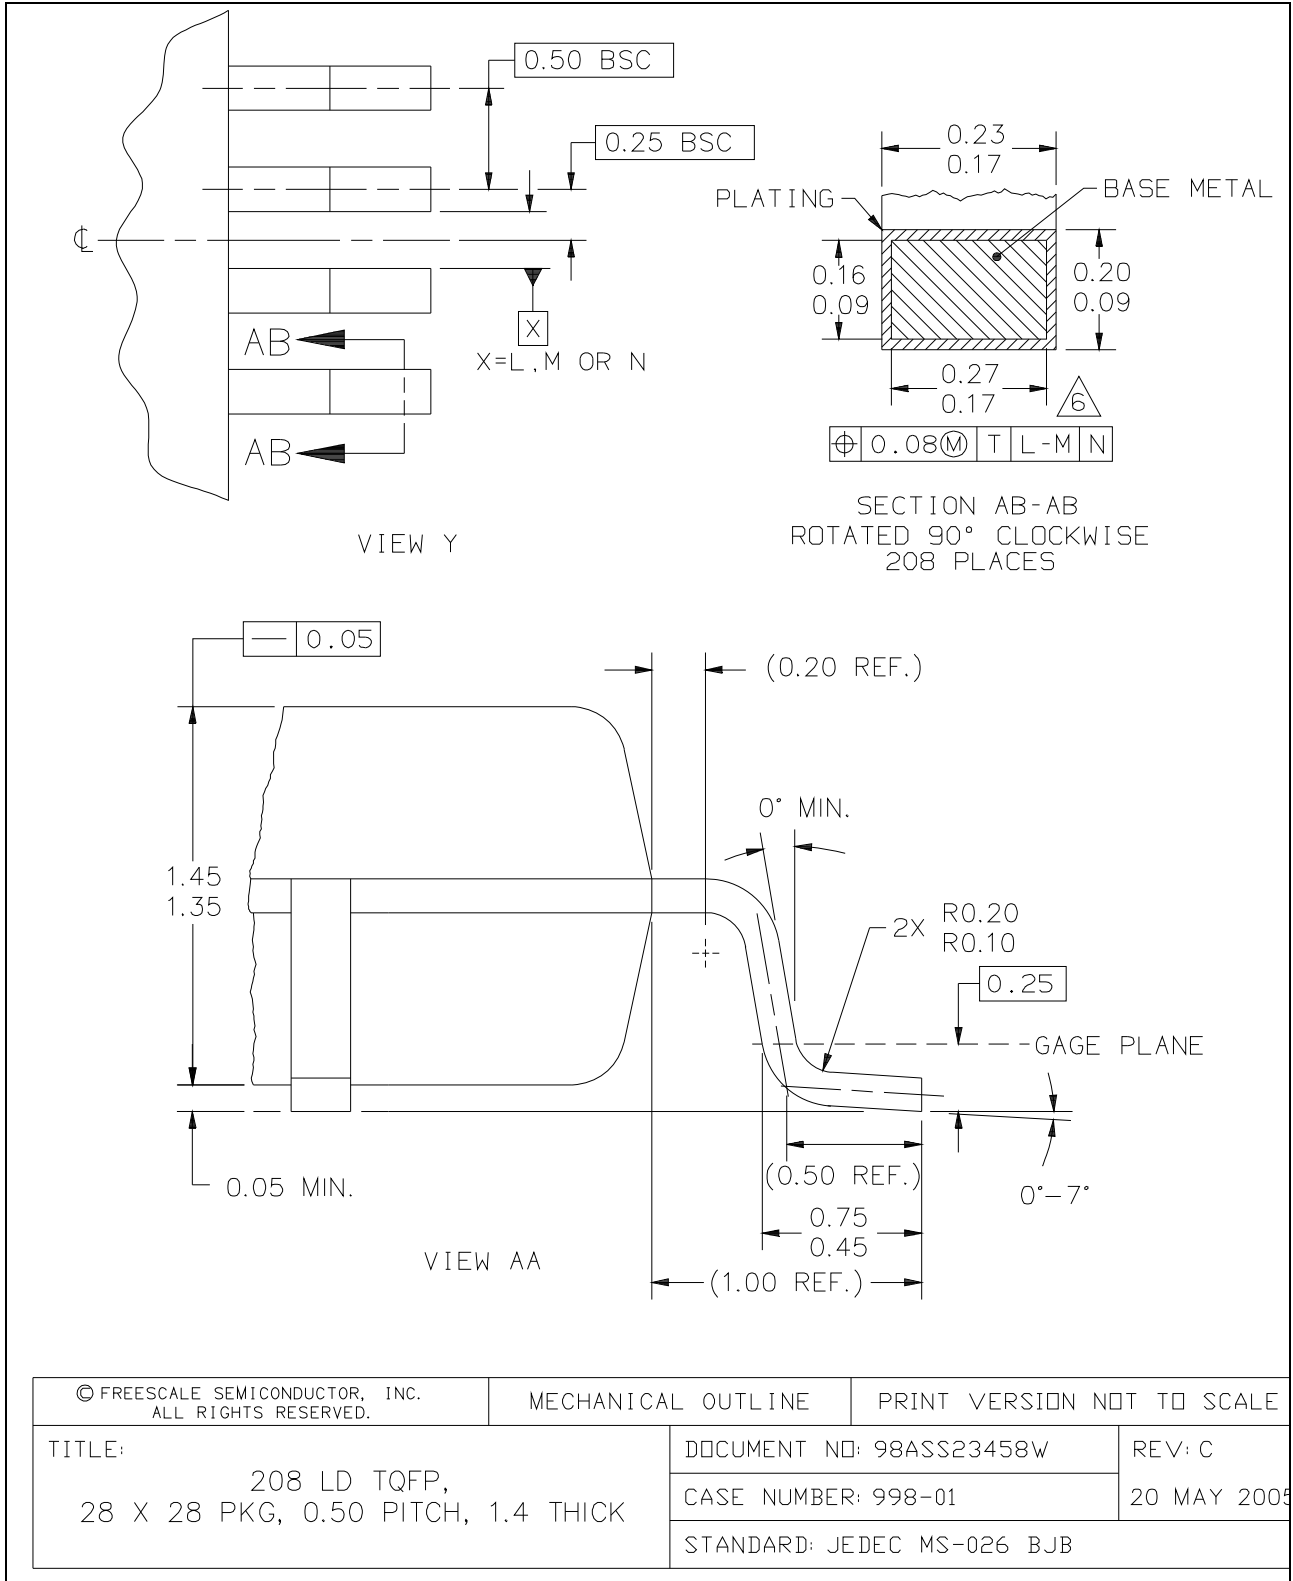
208 LQFP mechanical drawing (Part 2 of 3)
